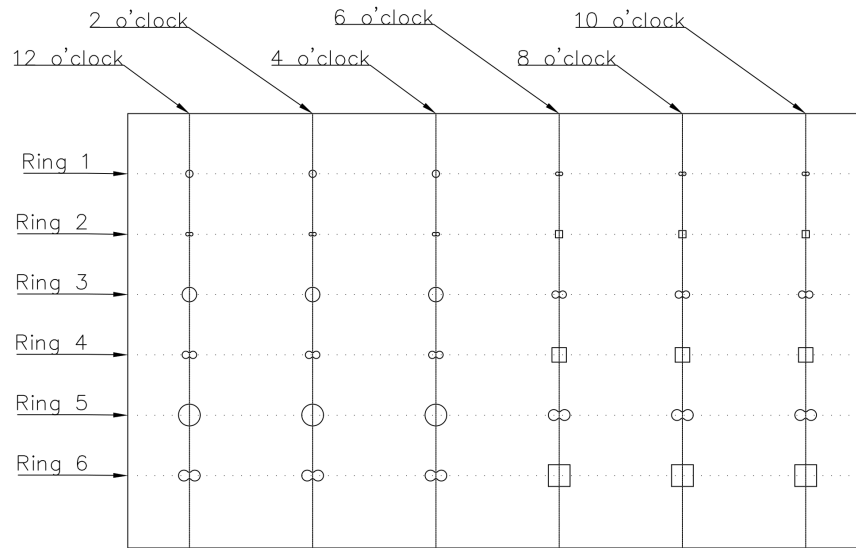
Schematic drawings of the design defects on an unwrapped sheet
